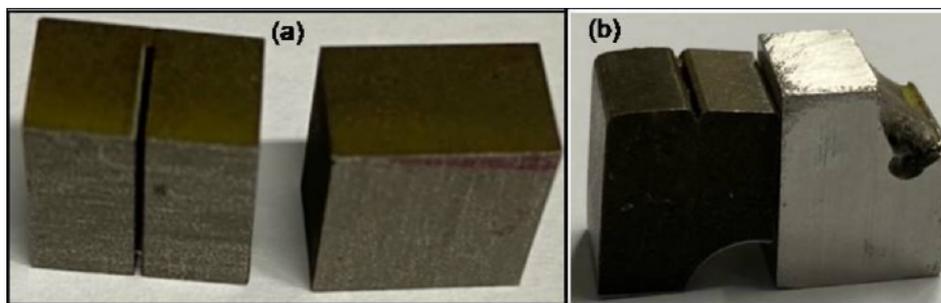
Samples of (a) base material and (b) fillet weld joint used for corrosion test
